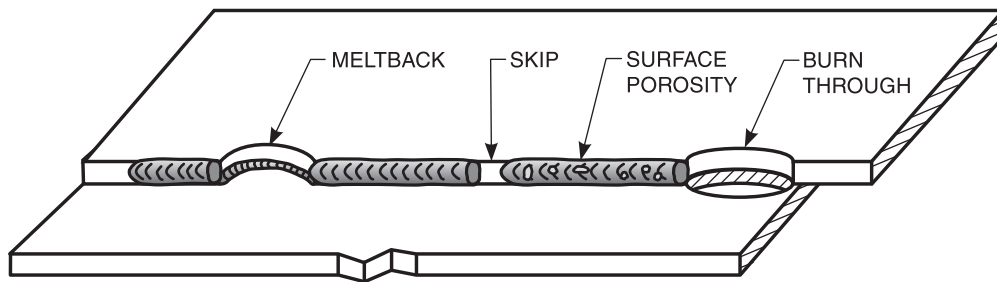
Examples of Discontinuities Found in Arc Welds
